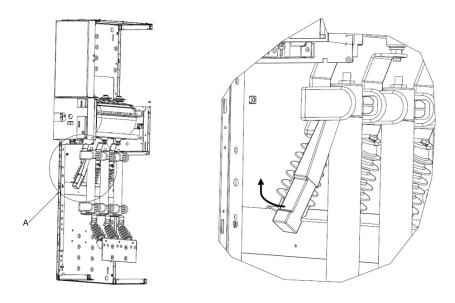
Pry Tool/Wedge Inside the Field Shaper
